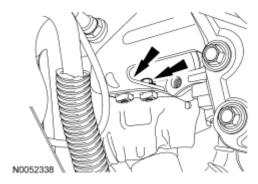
Locating Catalytic Converter Support Bracket Bolts Courtesy of FORD MOTOR CO.
